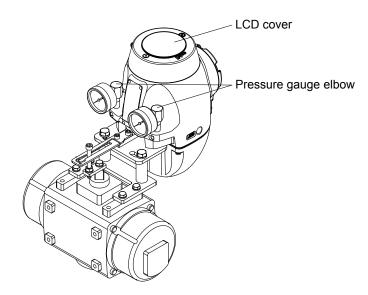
Example of LCD cover and pressure gauge elbow mounting
